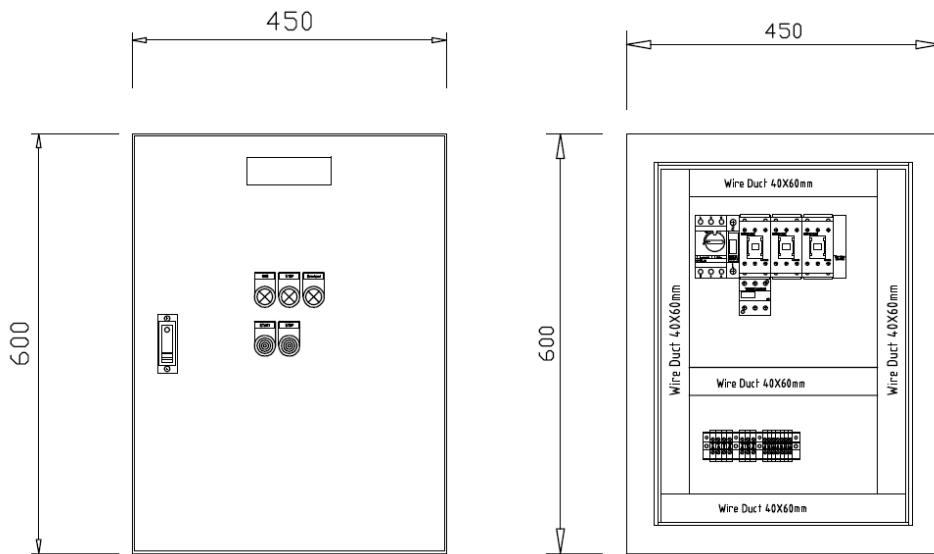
Front views and w/o front cover of Star-Delta motor starter.
